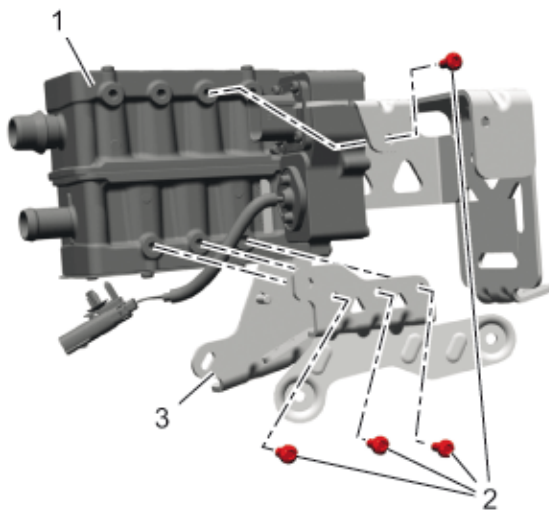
Heater Coolant Heater, Bracket And Bolts
